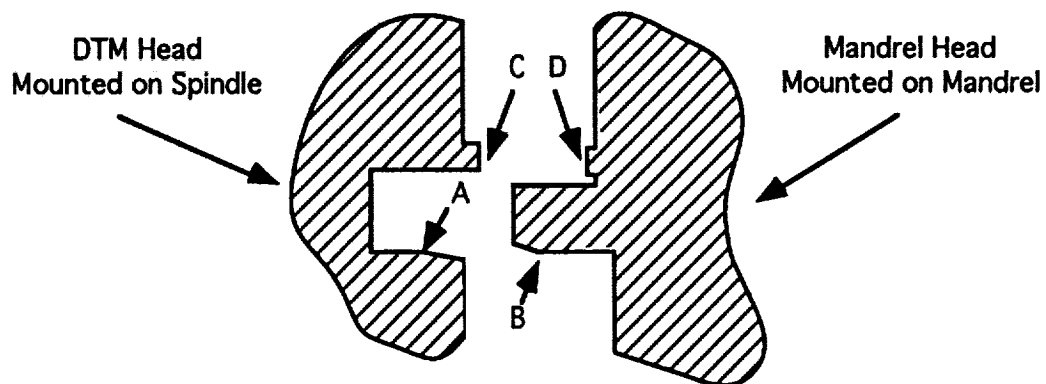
Detail of the tongue and groove used to align the mandrel on the diamond turning machine. The parts mate with a linear contact at points A and B and with a planar contact on surfaces C and D. This system ensured repeatable mounting of the mandrel to the DTM to within 10 micrometers at the far end of the mandrel.
